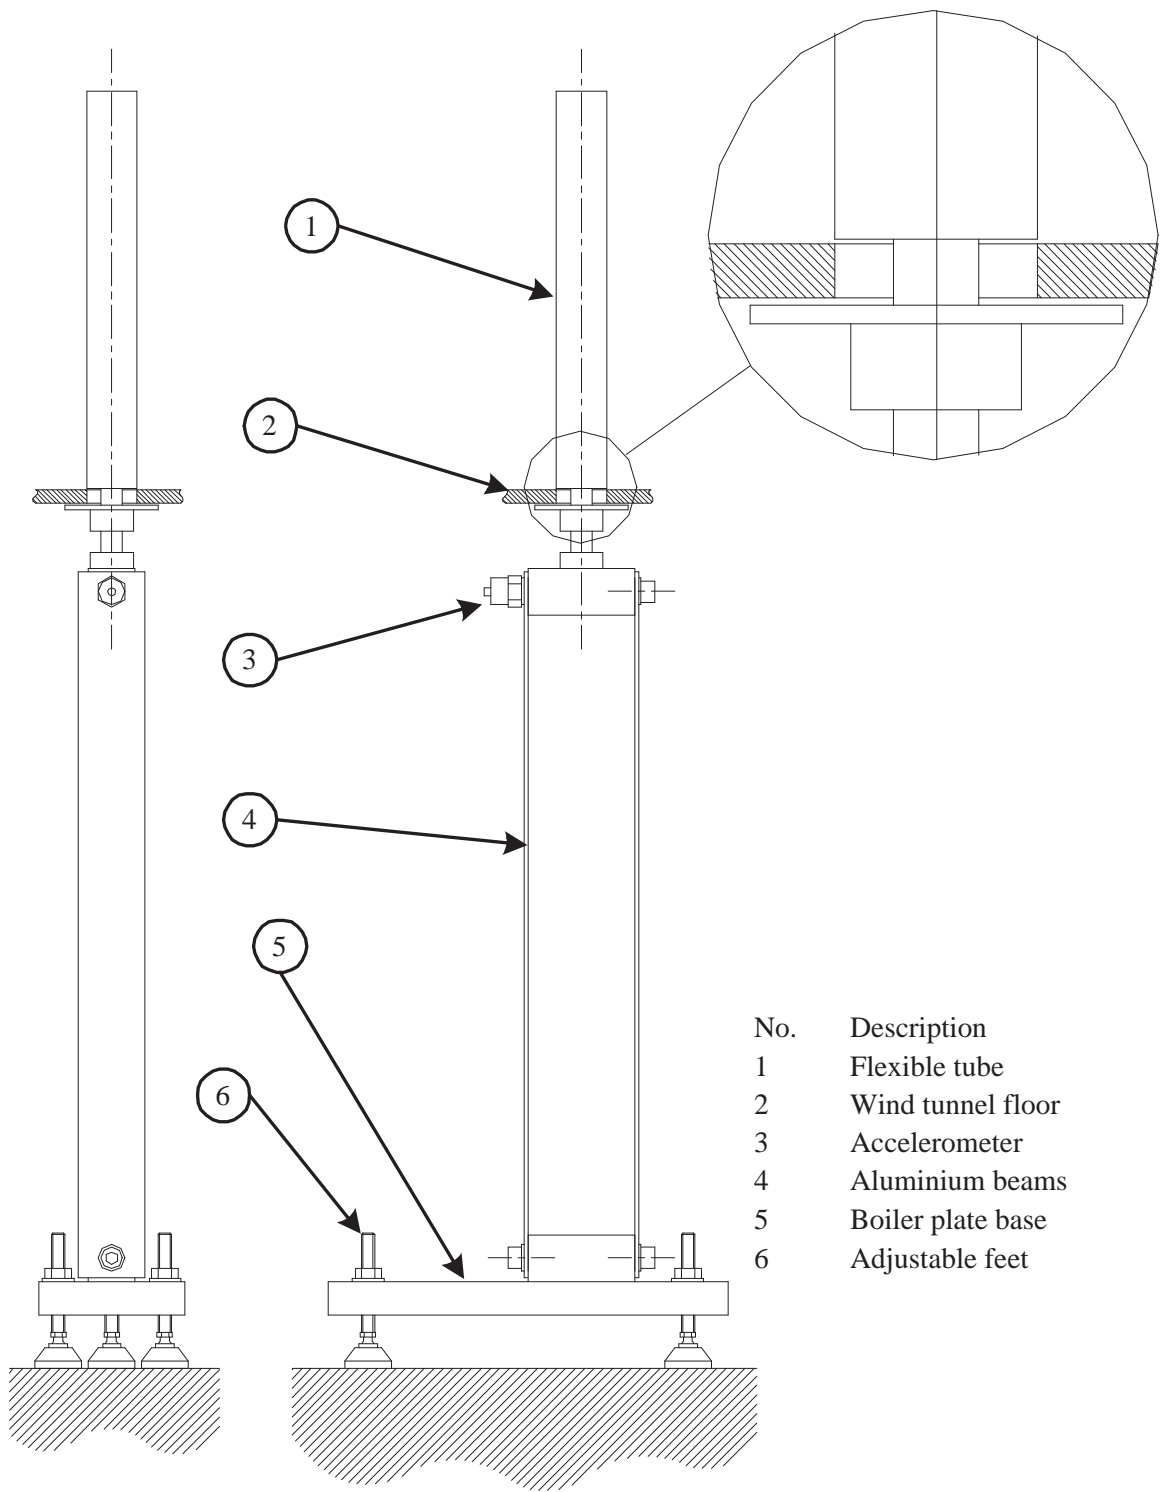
Assembly drawing of the twin beam flexible tube support.
